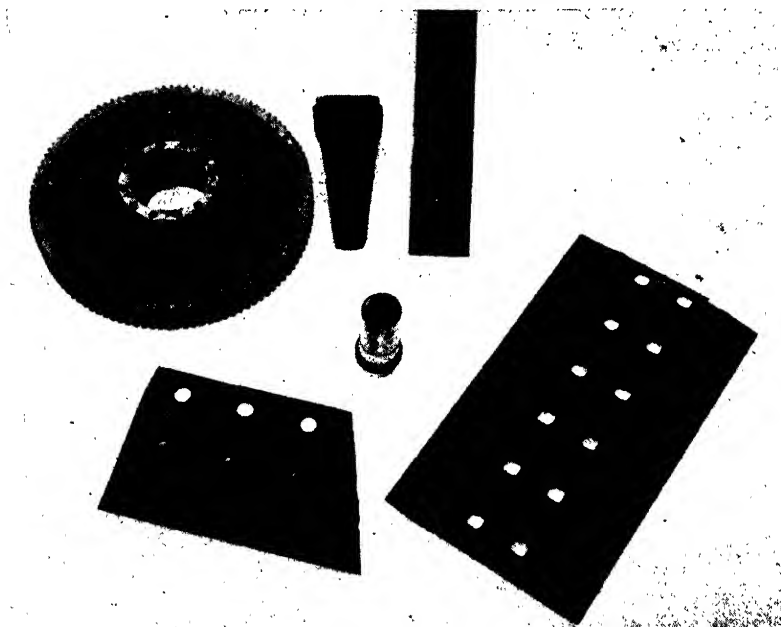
Although each of these parts has been hard faced or welded together, none would be readily weldable in the field because each has been heat-treated after welding to give special hardness or strength. (Courtesy of R. G. LeTourneau, Inc.)
